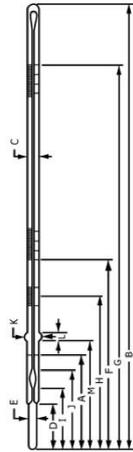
Test Gage for Checking Enlargements on Thermometers
